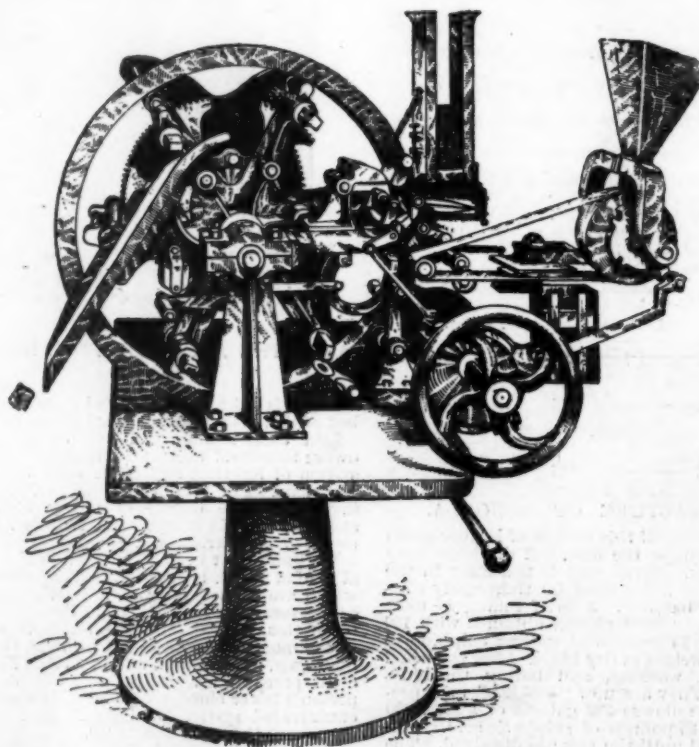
MACHINE FOR MAKING WOOD CHIP BOX COVERS.
